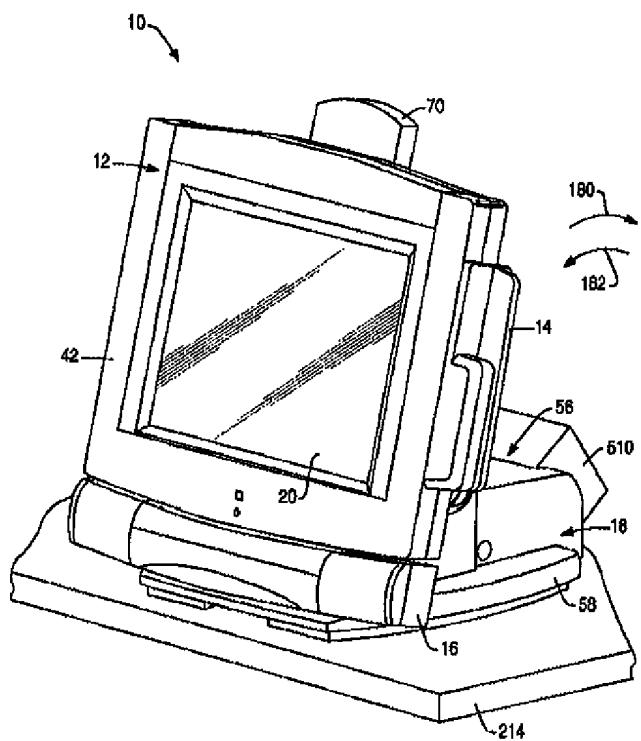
Drawing 38 is a side view of the retail terminal of Drawing 1 constituted so that an attached plate might be included instead of an angle fixed-foundations assembly or a pivot rotation basic assembly. A retail terminal is cautious of being fixed to a wall.
